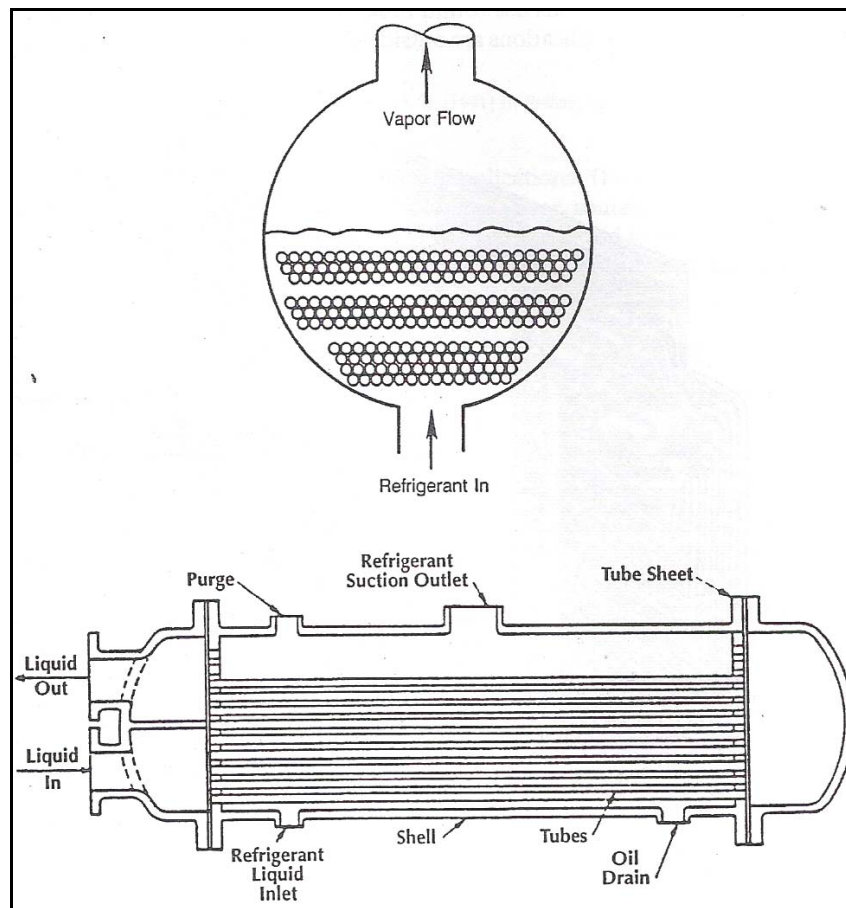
Flooded shell and tube evaporator (liquid cooler)
